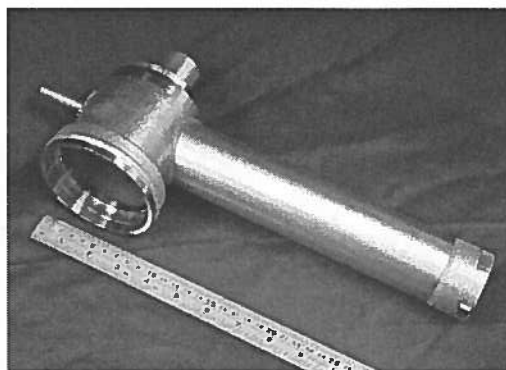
LC Ti-6Al-4V integrated boom/housing, after initial machining.
